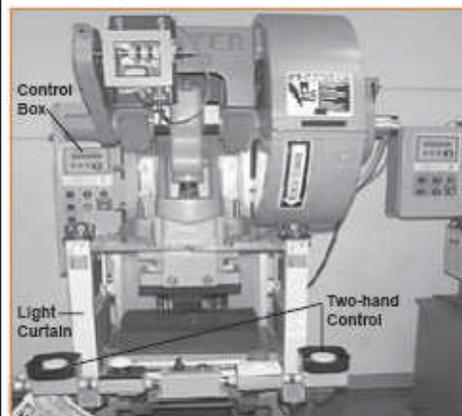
Part Revolution Mechanical Power Press with Two-Hand Control
